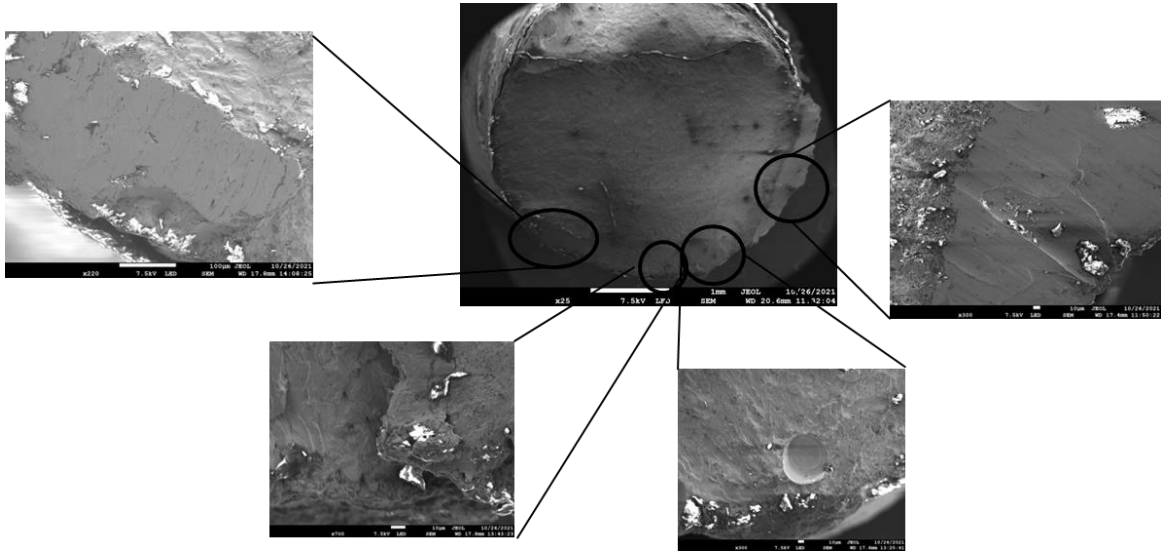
Fractography of fatigue bar 2 fabricated with 230 W.
